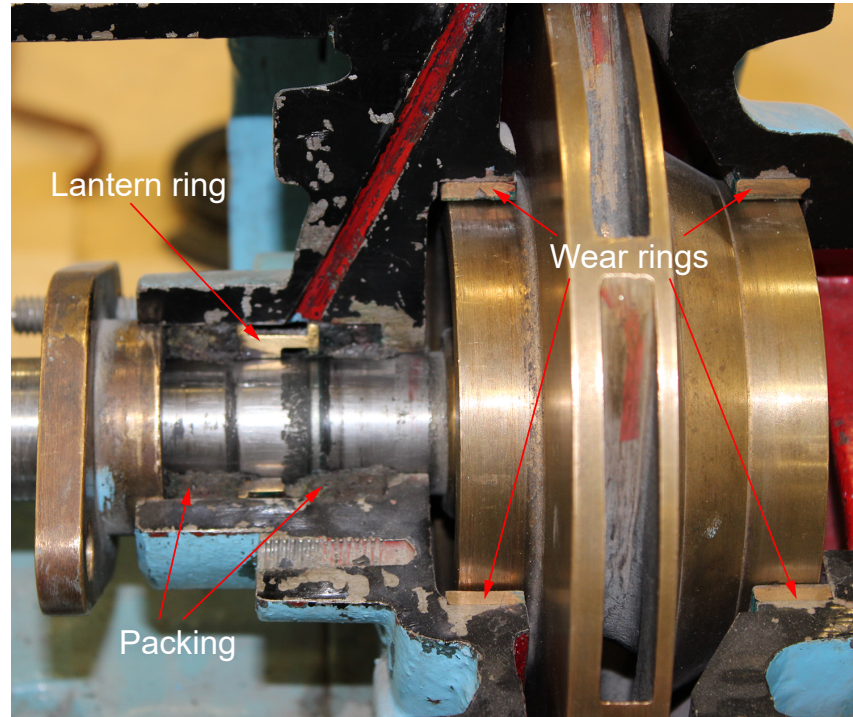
shows the location of the wear rings on a two-stage centrifugal pump. Wear rings are installed on the hub of the impeller, either by threading or shrinking.
